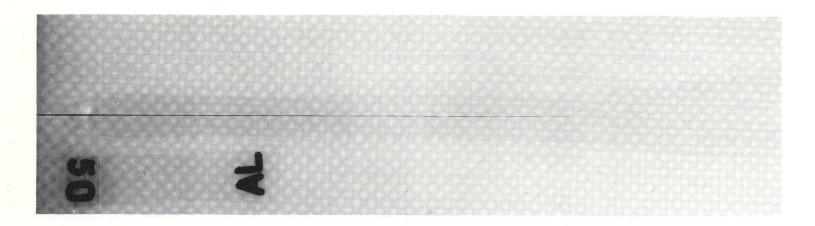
X-Ray Positive Print of Panel 3940 Showing Continuous Incomplete Penetration
